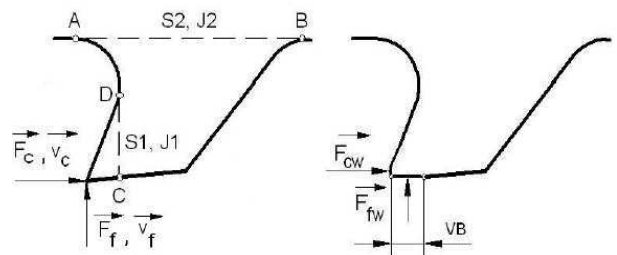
Schematic representation of planar stress of tool cutting edge (on the left – sharp tool; on the right – worn tool on the rake and flank) [4]
